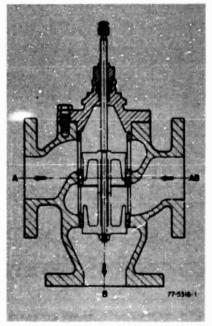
V5013C & E THREE-WAY DIVERTING VALVE
